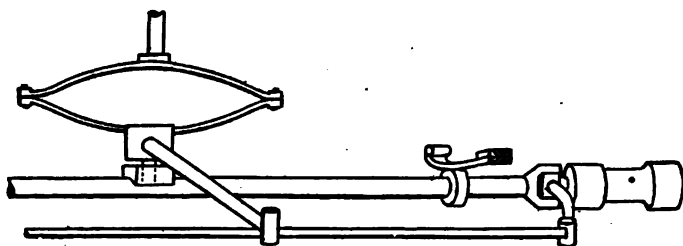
Spring Compensating Steering Device used on the Oldsmobile Carriage. The cut shows the spindle of the steering lever with its attached arm joining the transverse link at about the centre of its length. The attachment of one of the side springs is shown near the right-hand end of the axle. The small elliptical spring takes up and absorbs the vibrations of travel, rendering steering positive and uninterrupted.
